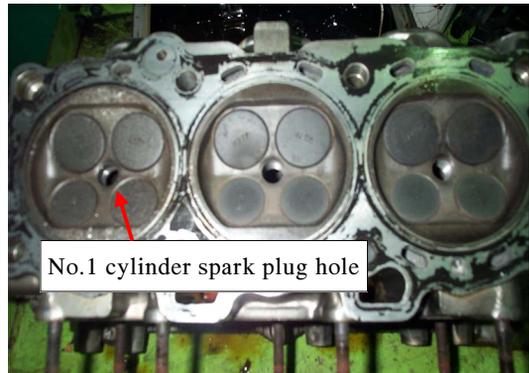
Spark plug hole damaged example for Number.1 cylinder combustion chamber of cylinder head
